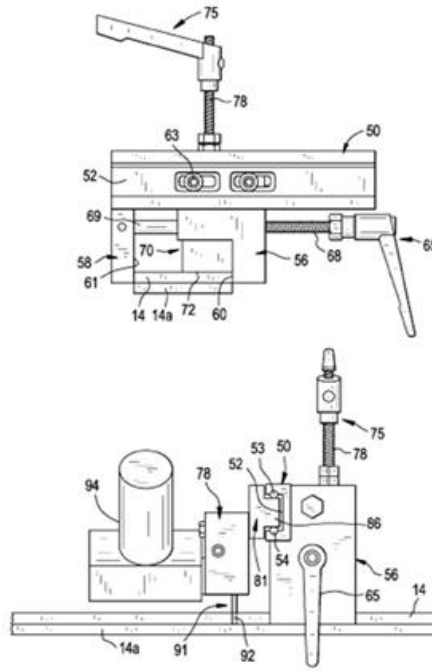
US 2013/0312250 Generator Rotor Refurbishing System and Method of Repairing a generator Rotor
